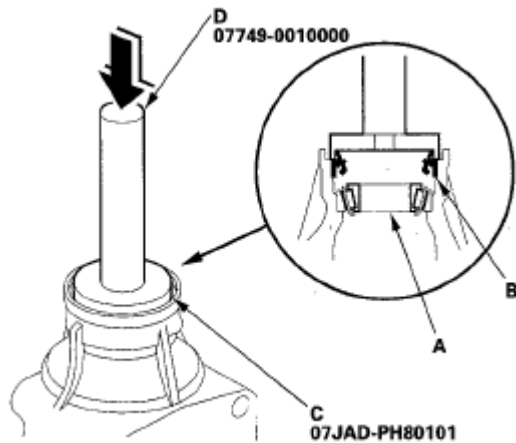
Installing Tapered Roller Bearing In Transfer Housing
